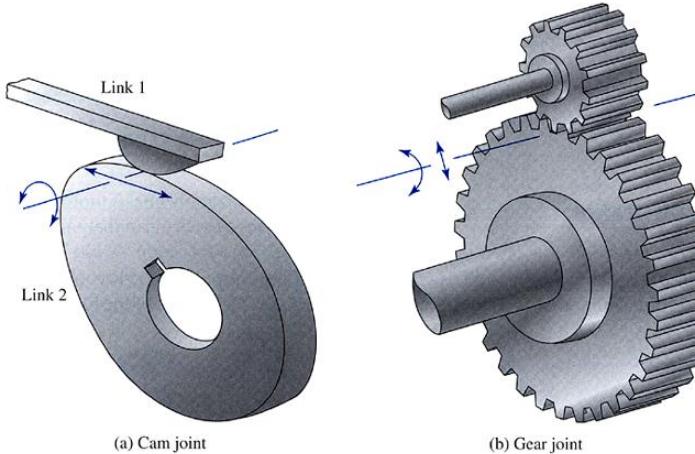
Higher-order joints: (a) Cam joint and (b) Gear joint.
